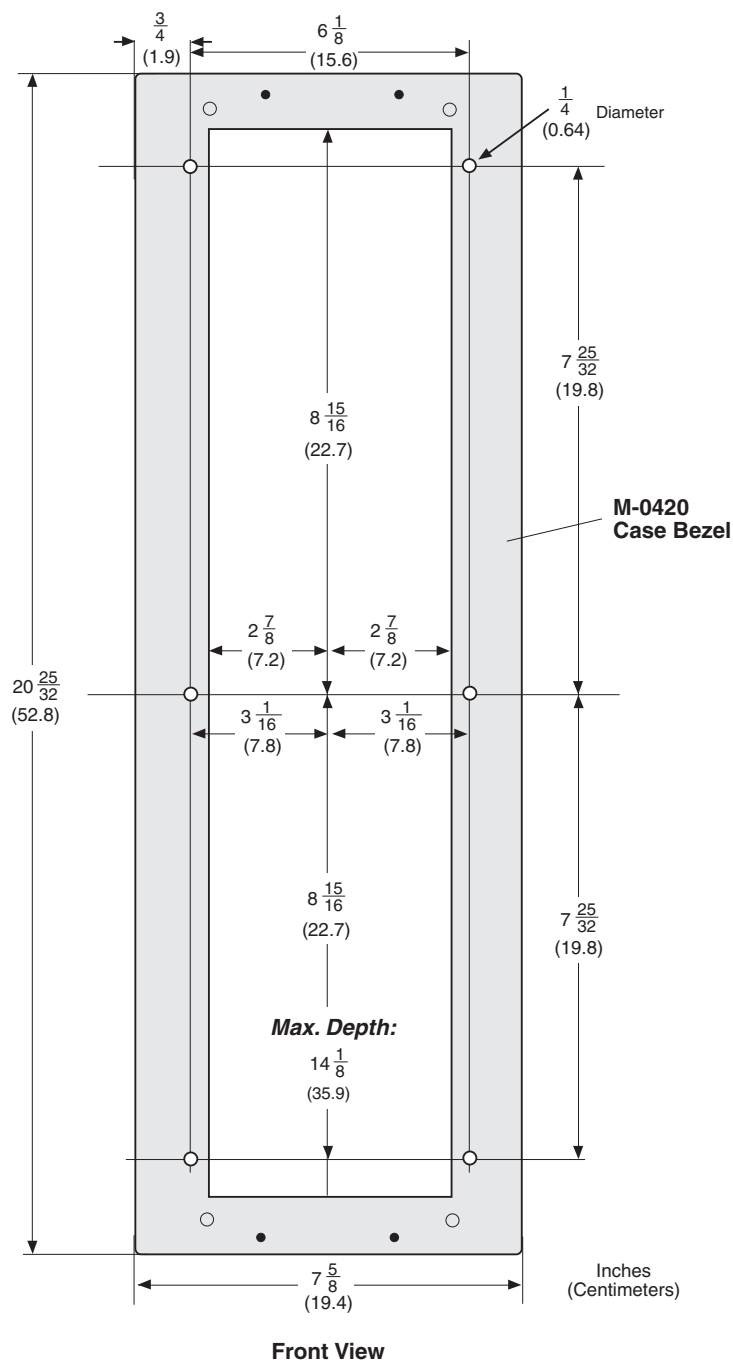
Mounting Dimensions for GE L-2 Cabinet
